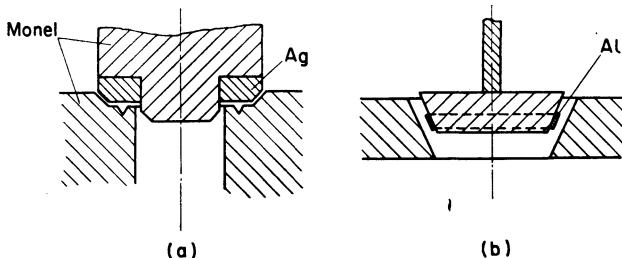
Gasket sealed closing systems for ultra-high vacuum valves: (a) silver ring compressed between hard Monel parts. After Bills¹²⁵ (*Courtesy of The American Institute of Physics*). (b) Aluminium ring in conical joint. After Kienel⁶⁷¹ (*Courtesy of Rudolf A. Lang Verlag, Esch/Taunus, Germany*)
